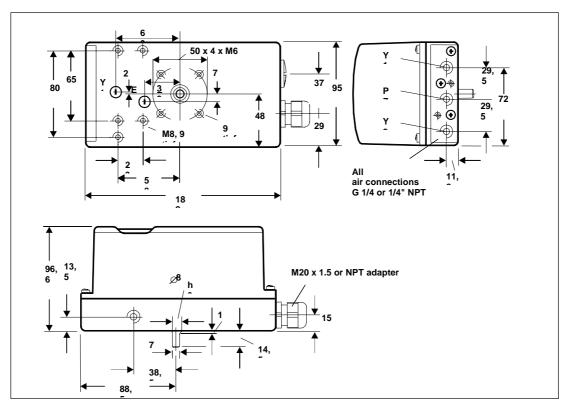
Drawing version plastic housing 6DR5xx0
